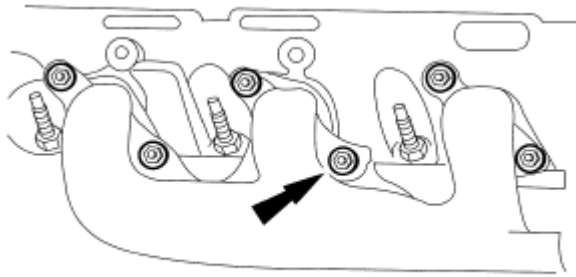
Identifying RH Exhaust Manifold And Nuts
